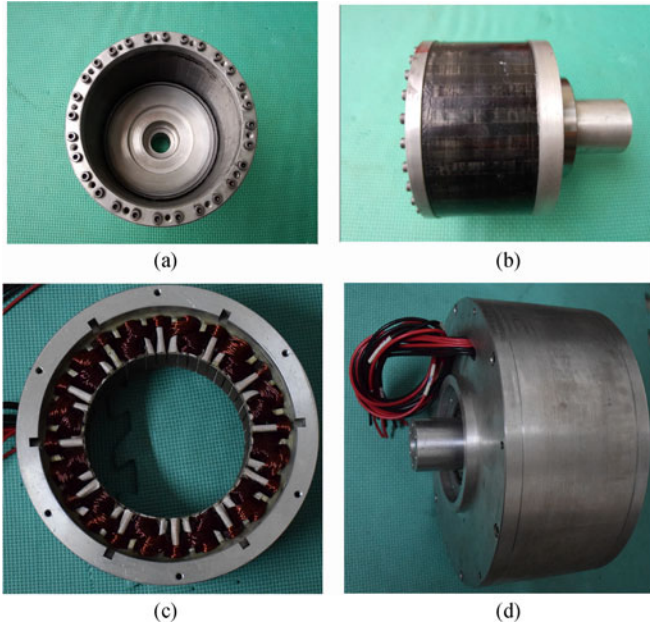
Machine prototype and its components. (a) Middle rotor. (b) Inner rotor. (c) Stator. (d) The assembled machine prototype.
